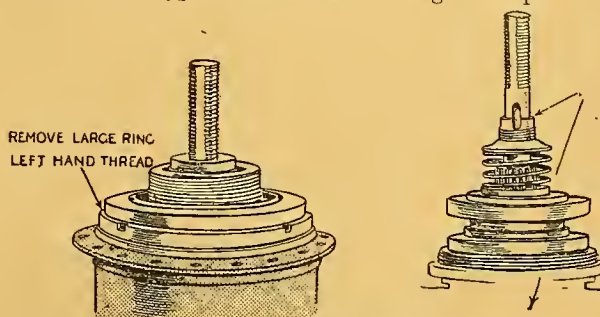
IMPORTANT. On depressing the spring and removing the key A, the whole gear will come to pieces.
